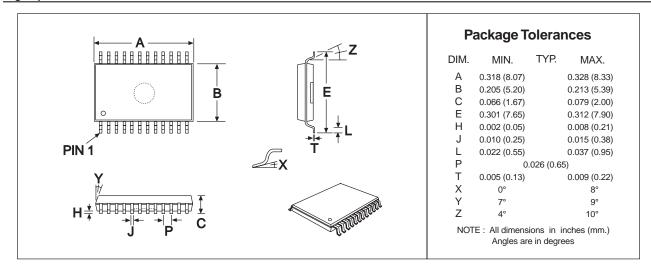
24-pin SSOP Mechanical Outline: Order as part no. CMX589AD5
